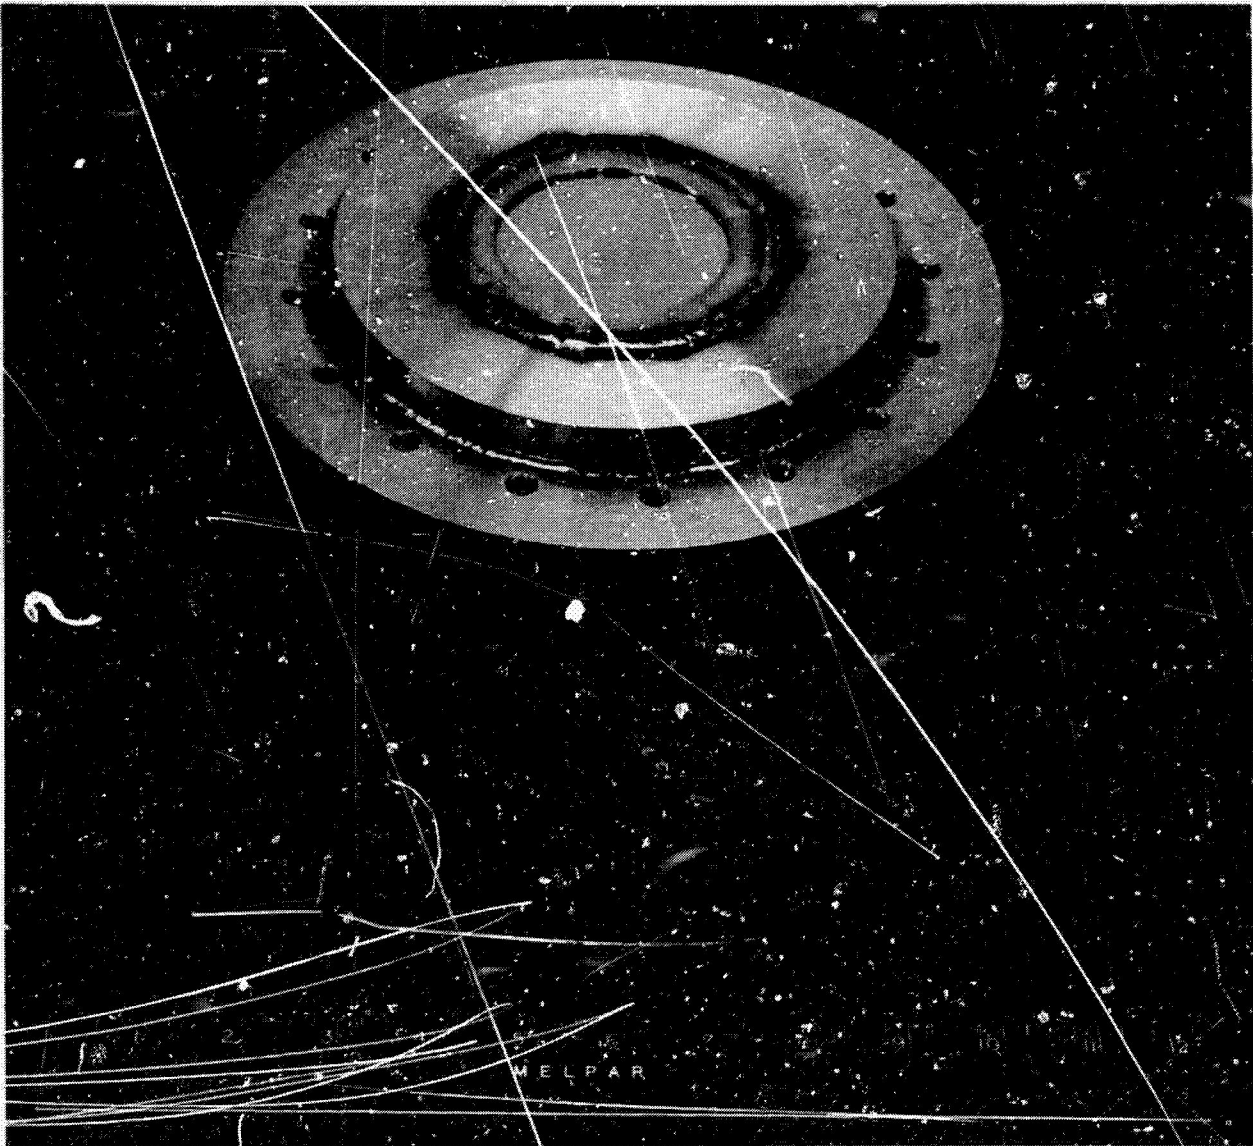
Weld-Sealed Diaphragm Mount Assembly
